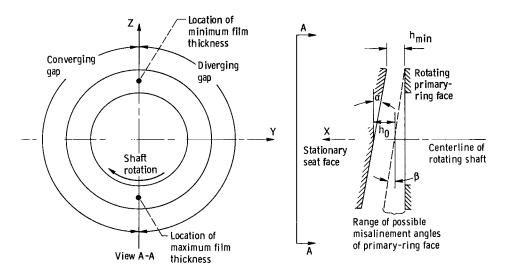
Converging and diverging gaps formed because of relative angular misalinement of primary-seal faces.
